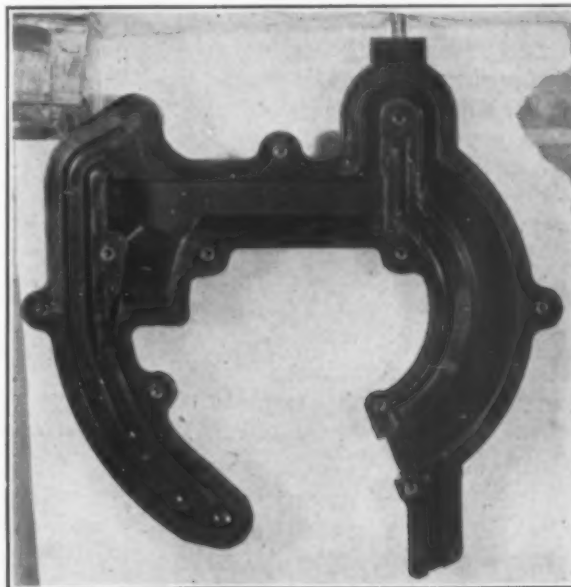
Showing the channels and joint grooves of gasoline gauge.
